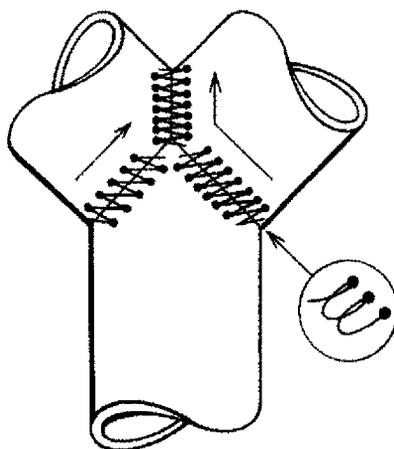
Weave pattern for welding a Y-joint.
